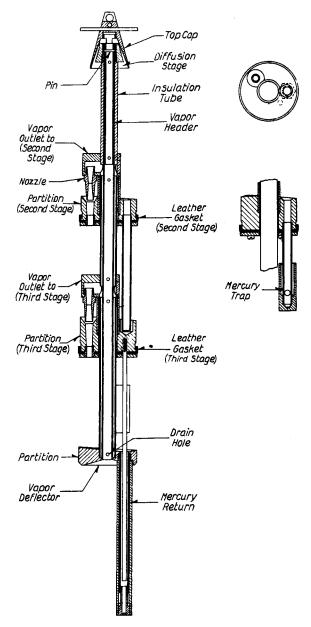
Sectional View of Pump Mechanism for Three-Stage
